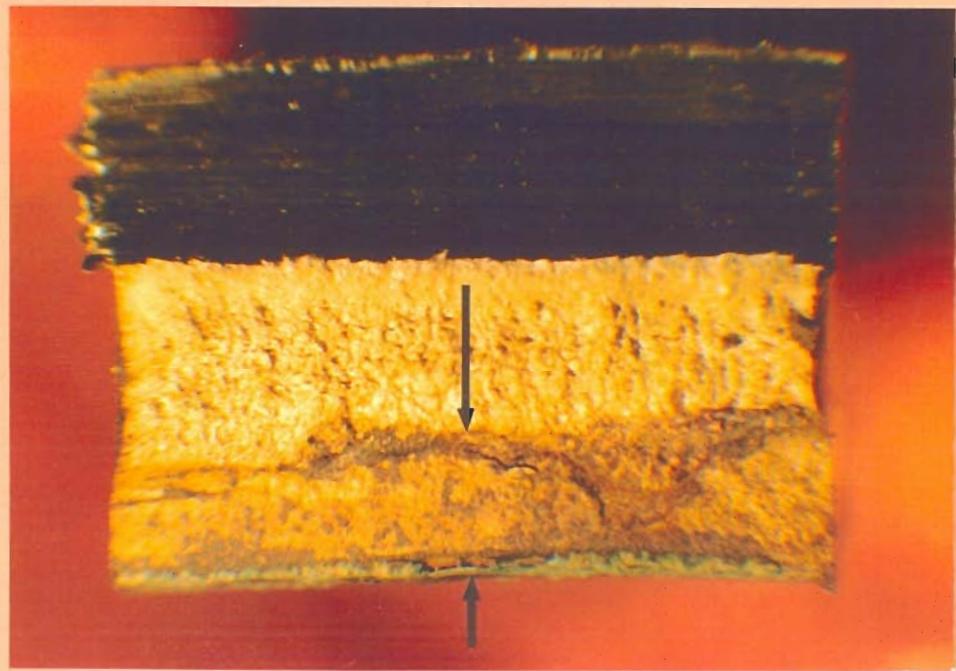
Depth of Defect in Longitudinal Weld, Arrows
